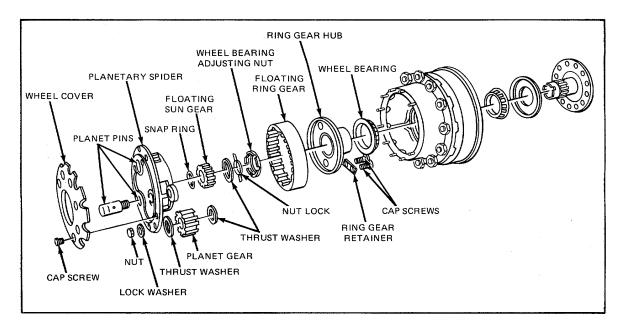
Exploded View Illustrating the Conventional Arrangement of Component Parts Used in Rigid Model Planetary Wheel Outer Ends
